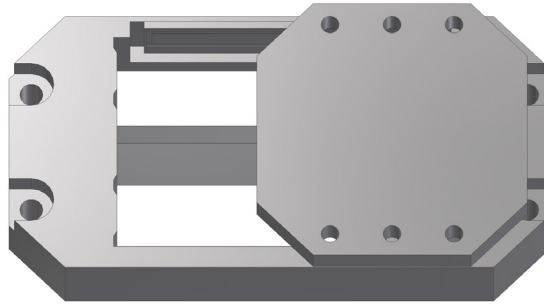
CAD drawing of the ANPx101eXT20/RES tested during the Attotest. The motor consists of three main parts: motor body, axis and platform. Once the motor body is fixed to another surface, the only movable part is the platform. The platform enables the attachment of a Rear Wall hole cover by six screw holes [Bab14].
